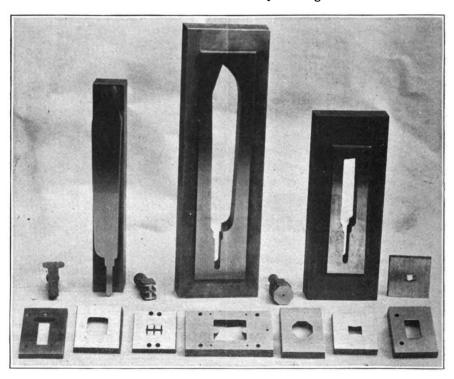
A NUMBER OF DIES MADE ON A DIE MILLING MACHINE.
